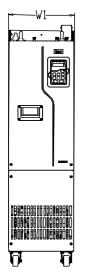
380V 110–200kW VFD flange mounting diagram Table C-5 380V 11–200kW VFD flange mounting dimensions (unit: mm)
